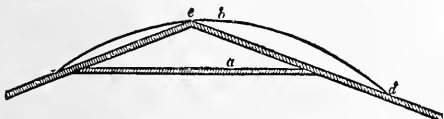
Sawing the Circular Piece for Miter Cuts.
